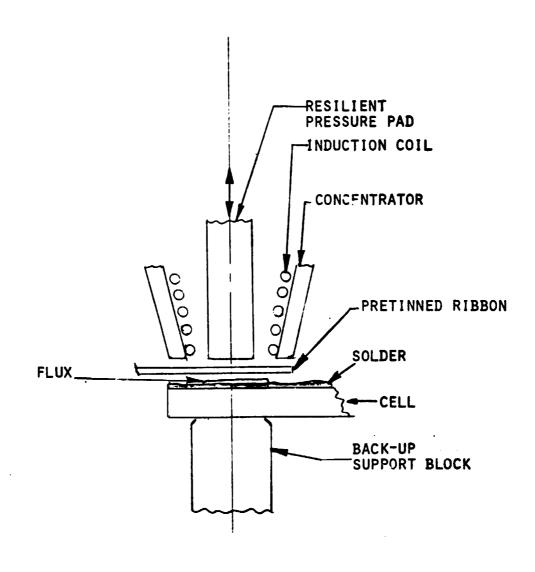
BOND SOLDERING METHOD- 1st INTERCONNECT
